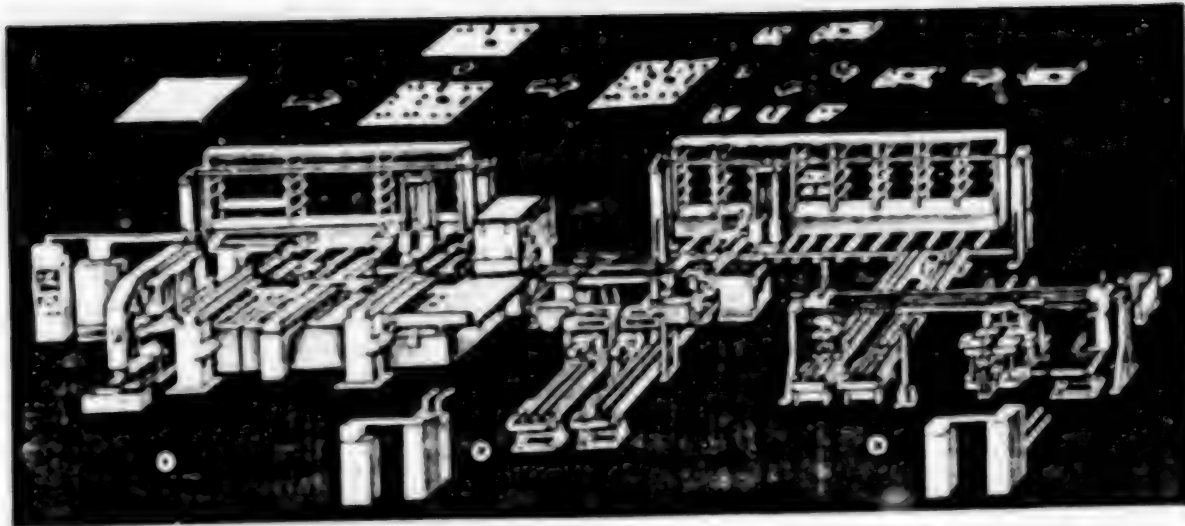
GP section for manufacturing housings for devices and radio apparatus using a 400 kNewton coordinate-turret processing center.
